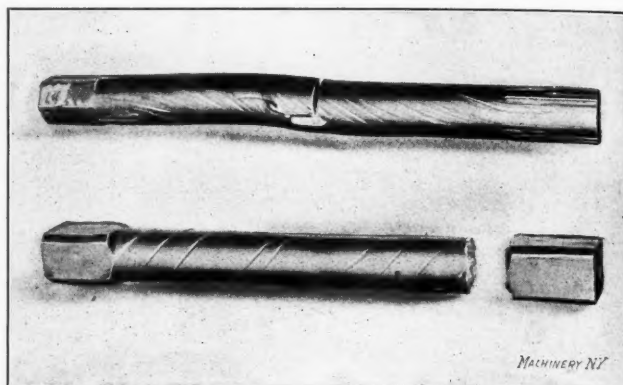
Condition of Shafts Broken in Tests shown in Fig. 17; the Gears were Uninjured
